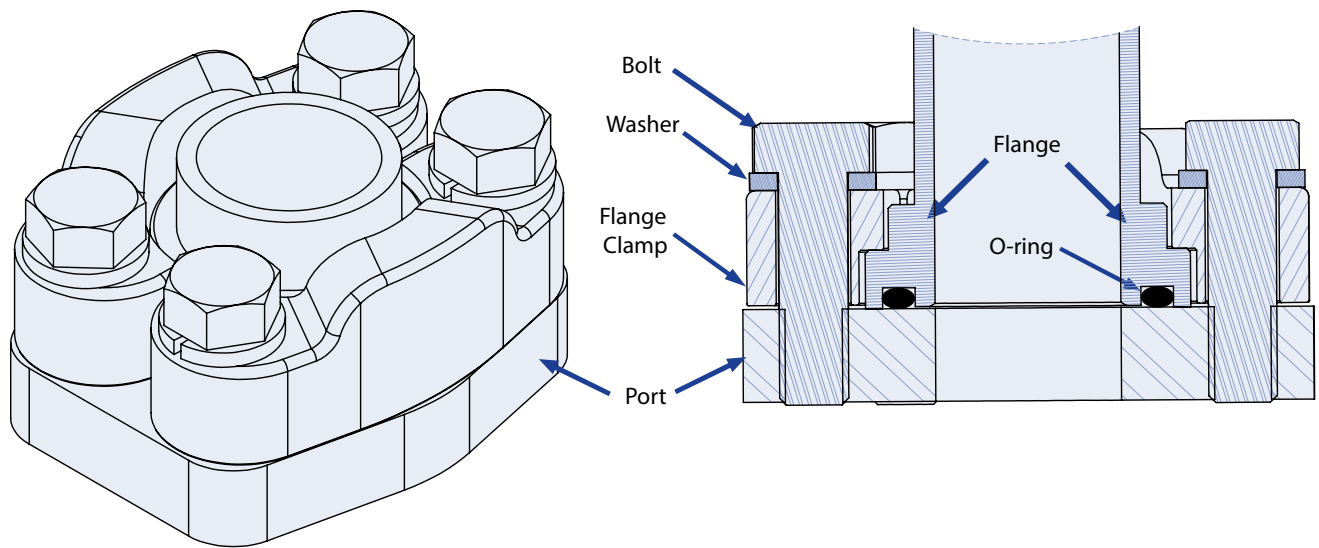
Flange Port Assembly (Left) Cross Section Flange Port Assembly (Right)
